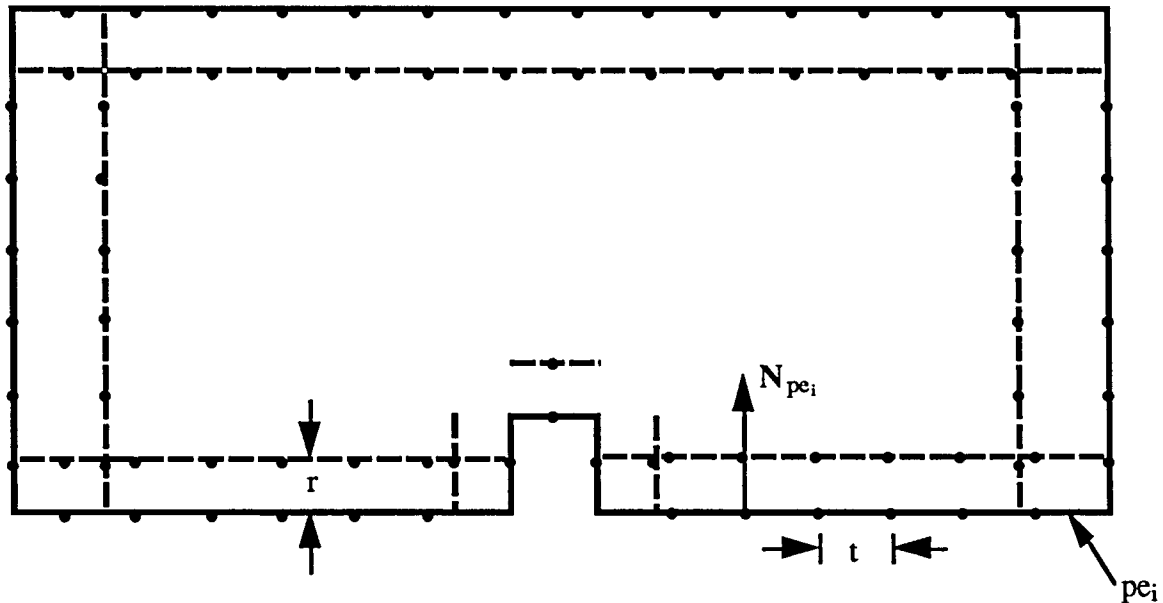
Projected workpiece with candidate fixturing points and the notations r , t , pe_i , and N_{pe_i} marked on it
